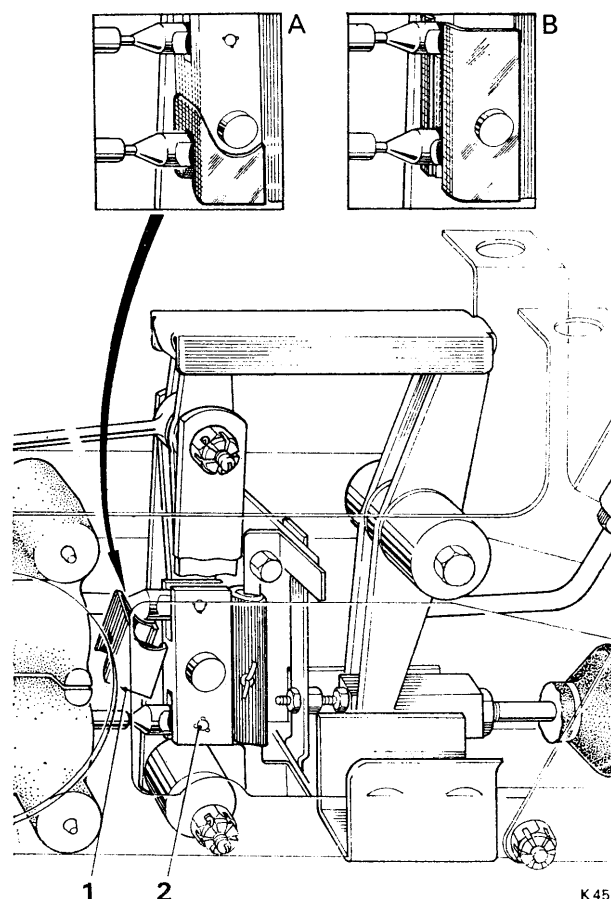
METHOD OF FITTING THE FULCRUM PIN RETAINING CLIPS—EARLY CARS AND RETAINING PLATES—LATER CARS
